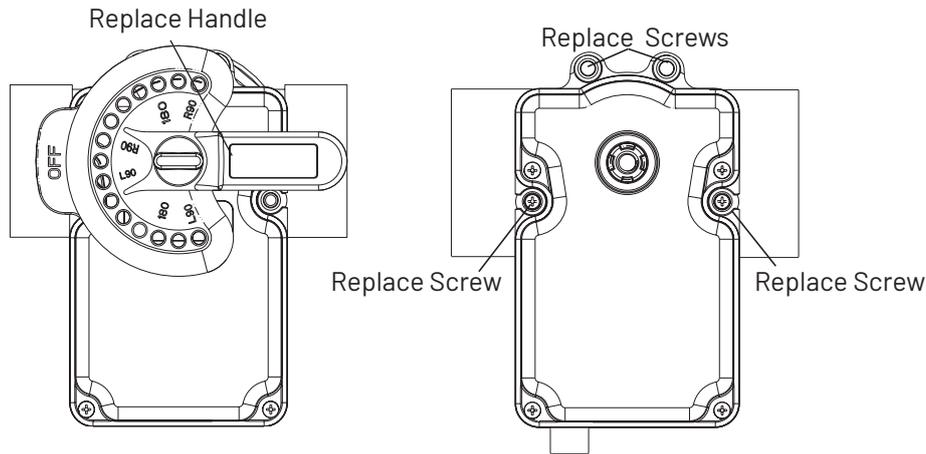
Actuator mounting screws. Use long screws provided with actuator.
